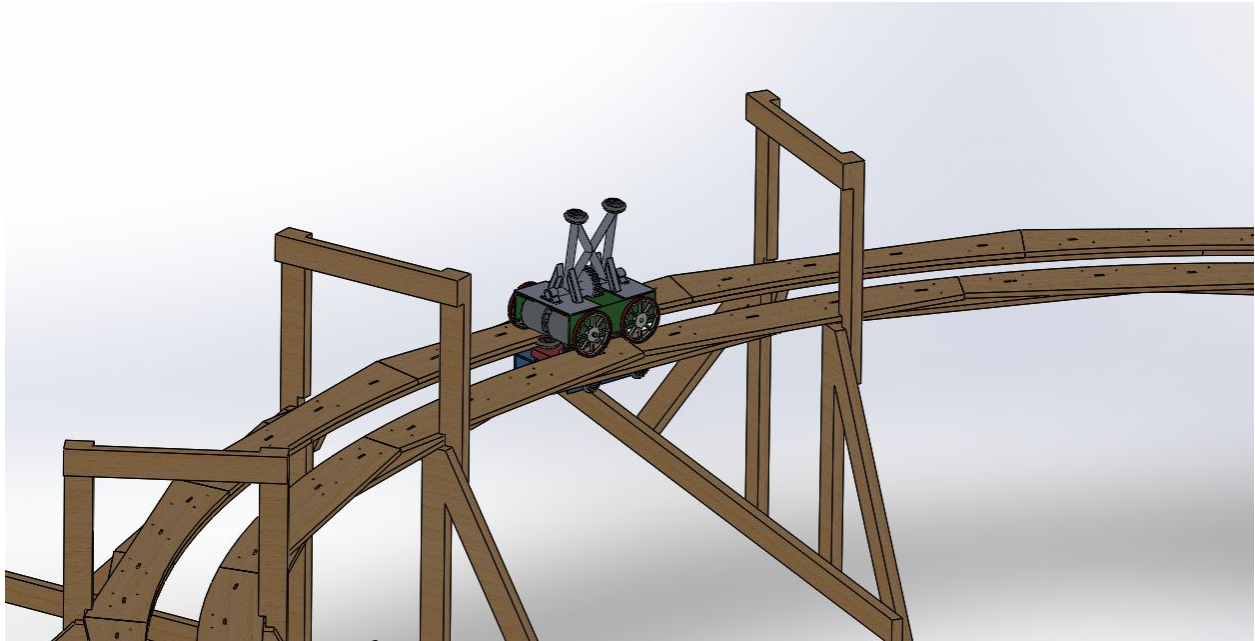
The CAD drawing above shows the way each track piece interacts with each other
